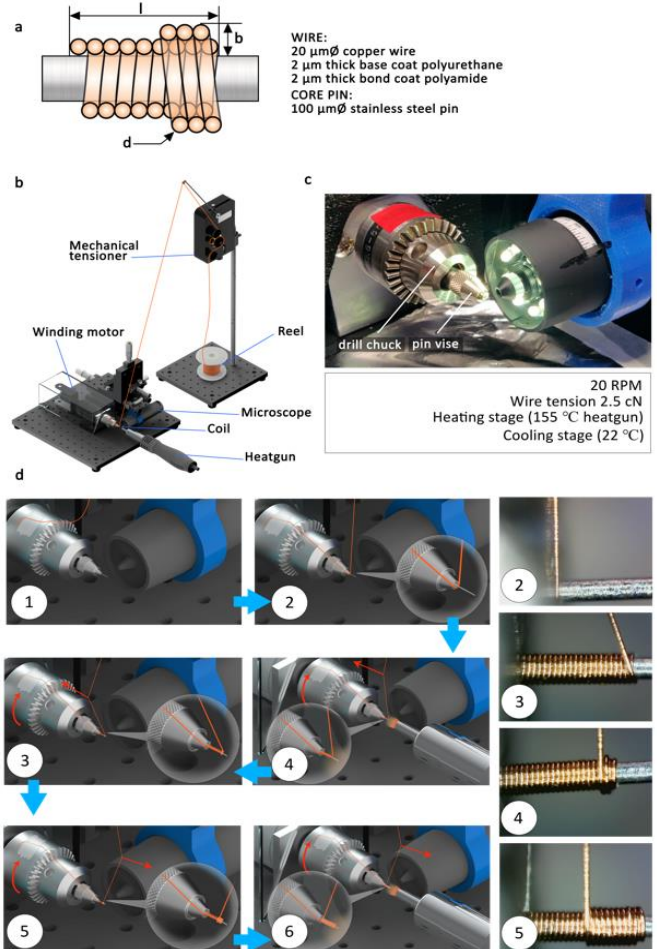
Manufacturing process of the microcoils. (a) Helical winding design of the coil and materials; (b) microwinding machine (c) closeup photograph of the microwinding machine (d) Schematics of the winding process steps (d left), and real microscopic photographs of the results at each step (d right).
